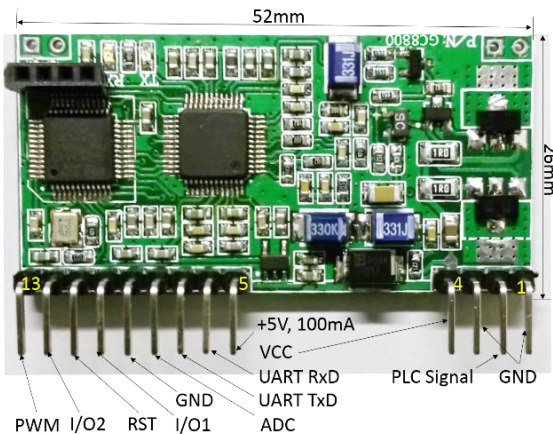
GC8800 PLC Module Dimensions and Pin Locations
